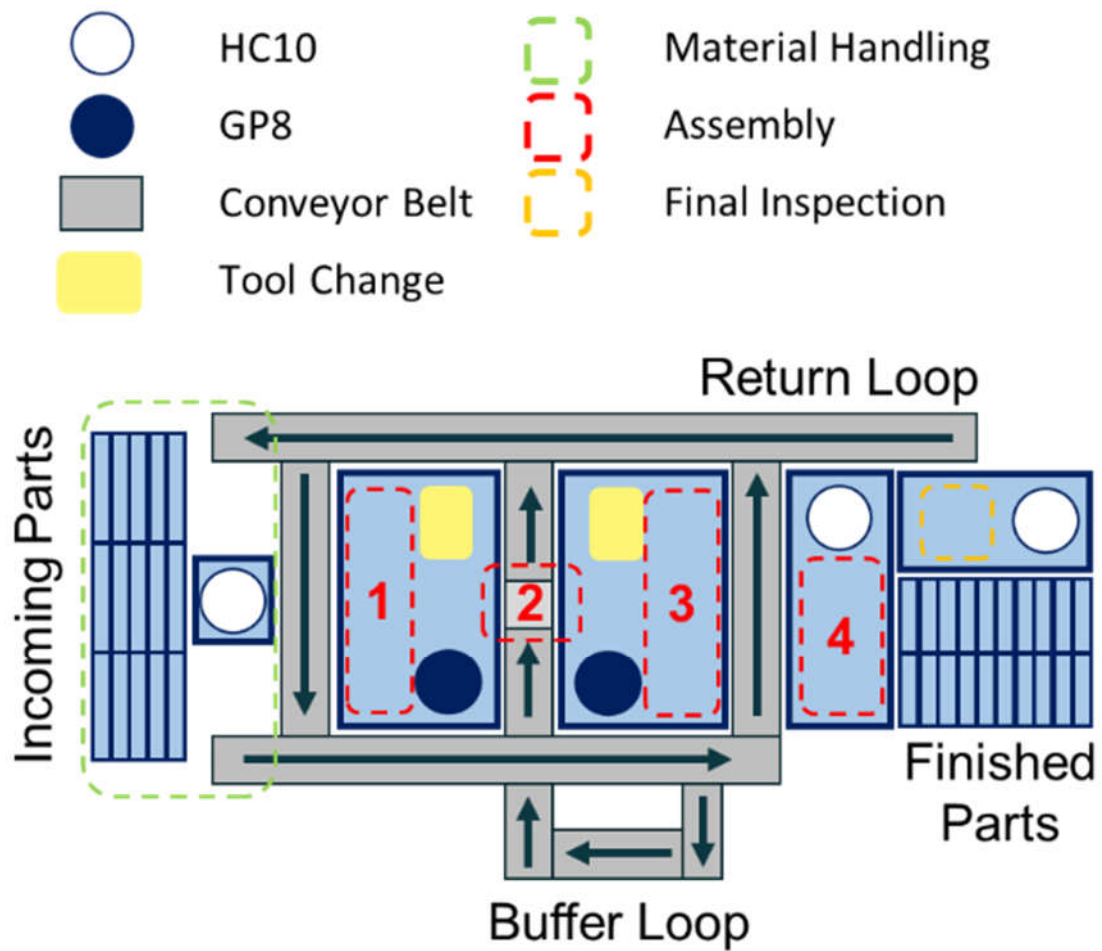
Top view of the cell design with Material Handling, Assembly, and Inspection Areas
